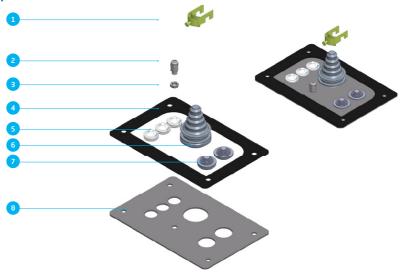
Bottom plate with mounting material Twin 4 XL NL
